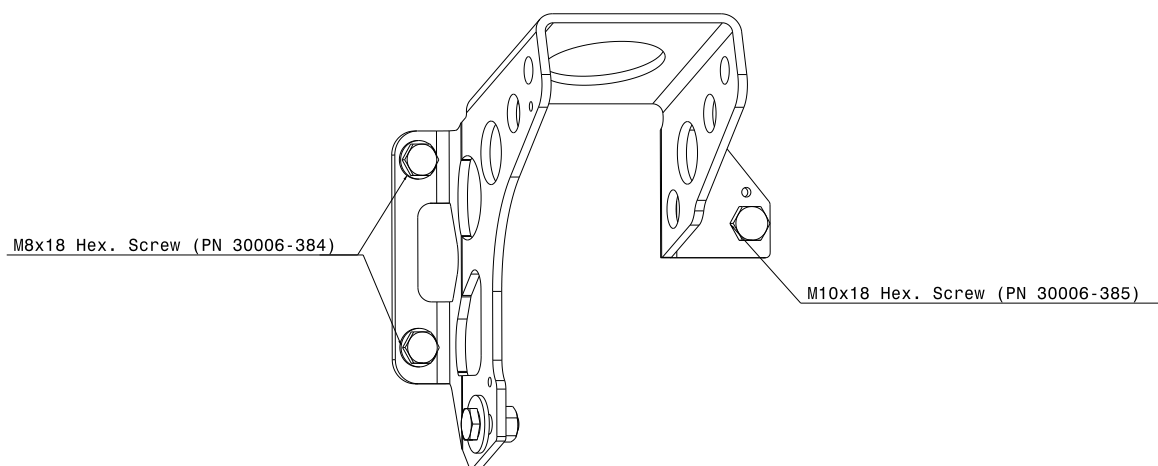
Isometric view Mounting Frame 70A 915iS
